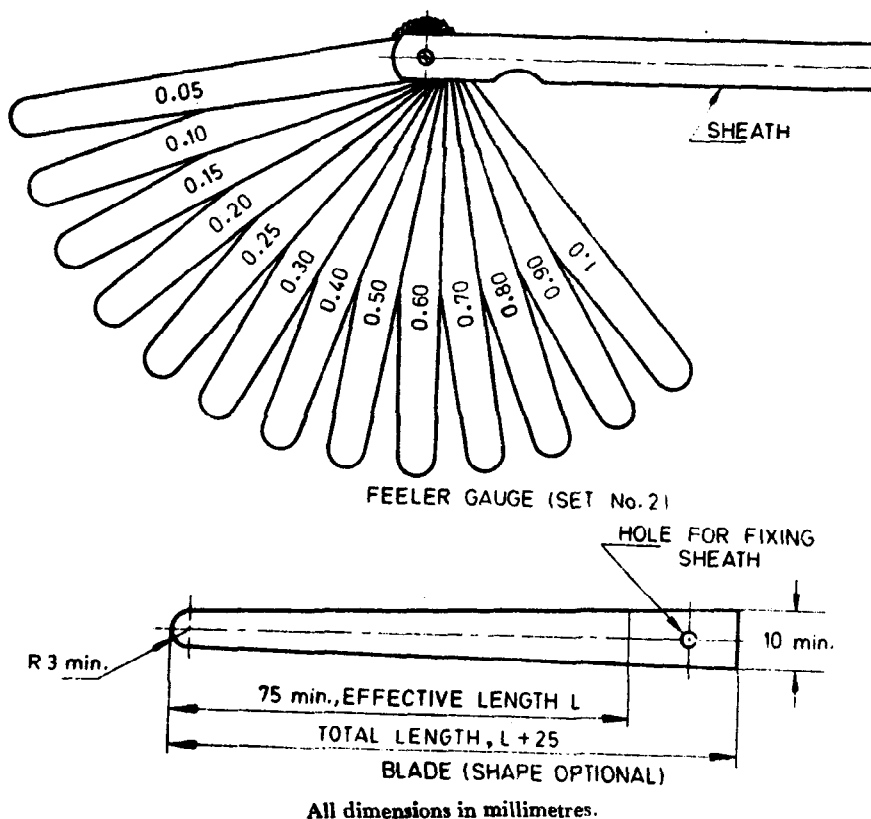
DIMENSIONS AND ASSEMBLY OF FEELER GAUGE
